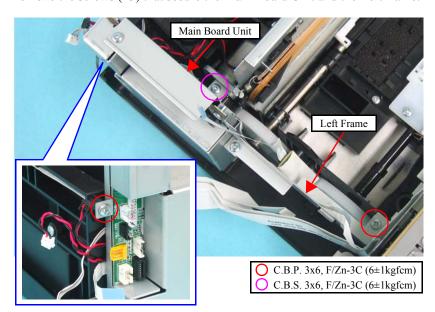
Removing Main Board Unit/Left Frame (2)
